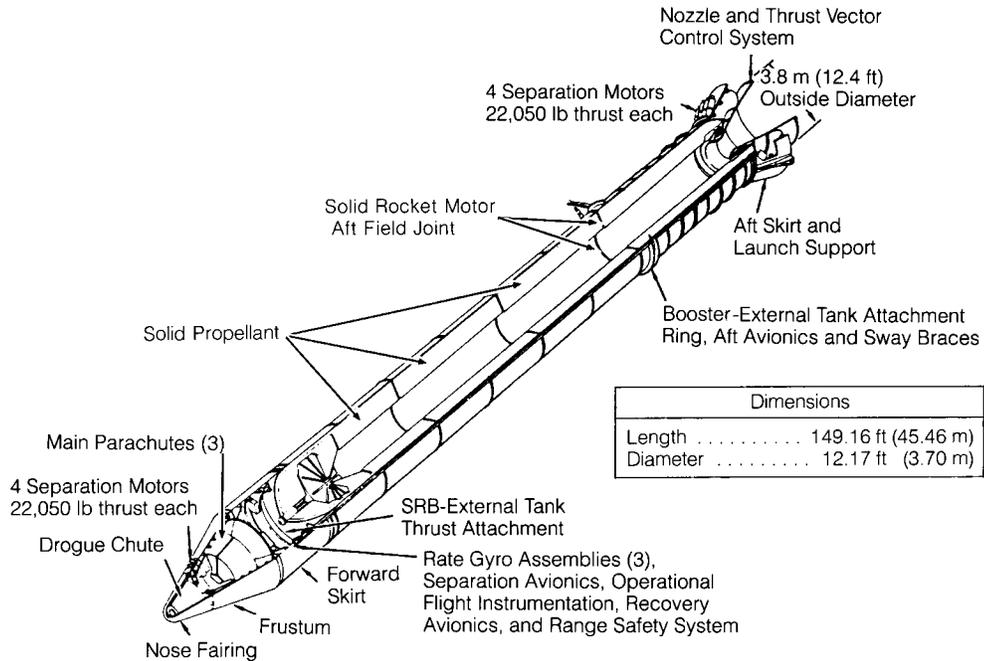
Cutaway solid rocket booster View<sup>97</sup>
